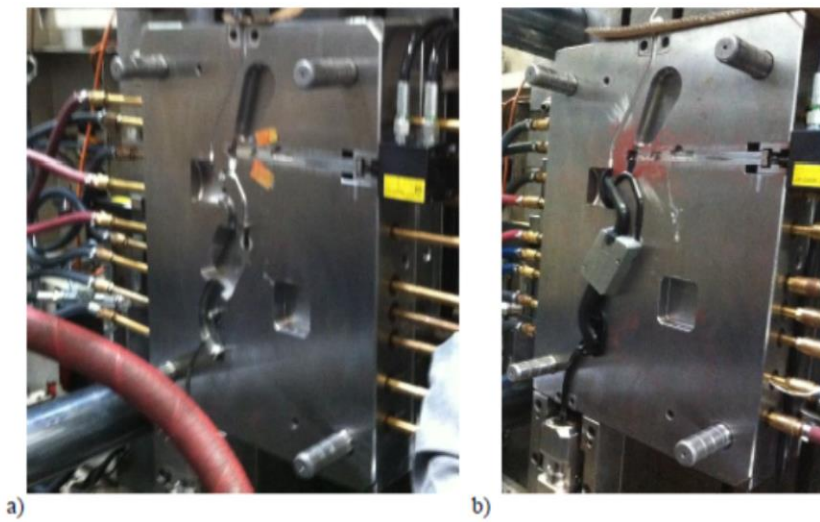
First version of the mold to produce the clutch pedal: a) fixed part; b) mobile part.
